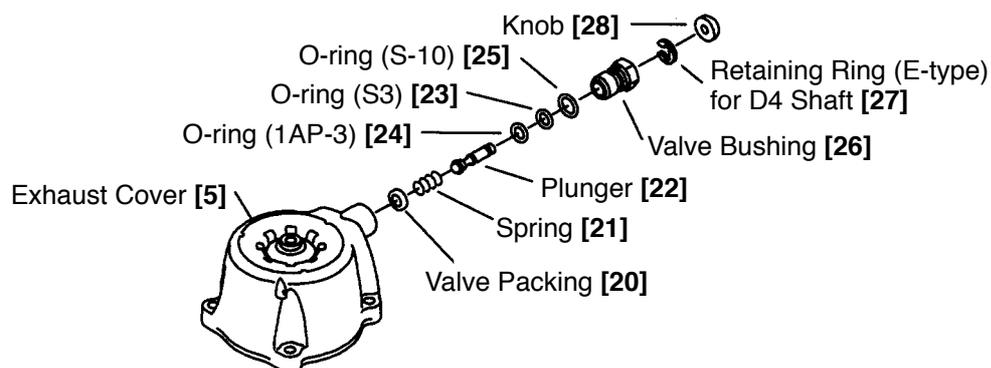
Disassembly and reassembly of the valve bushing, plunger, etc.
